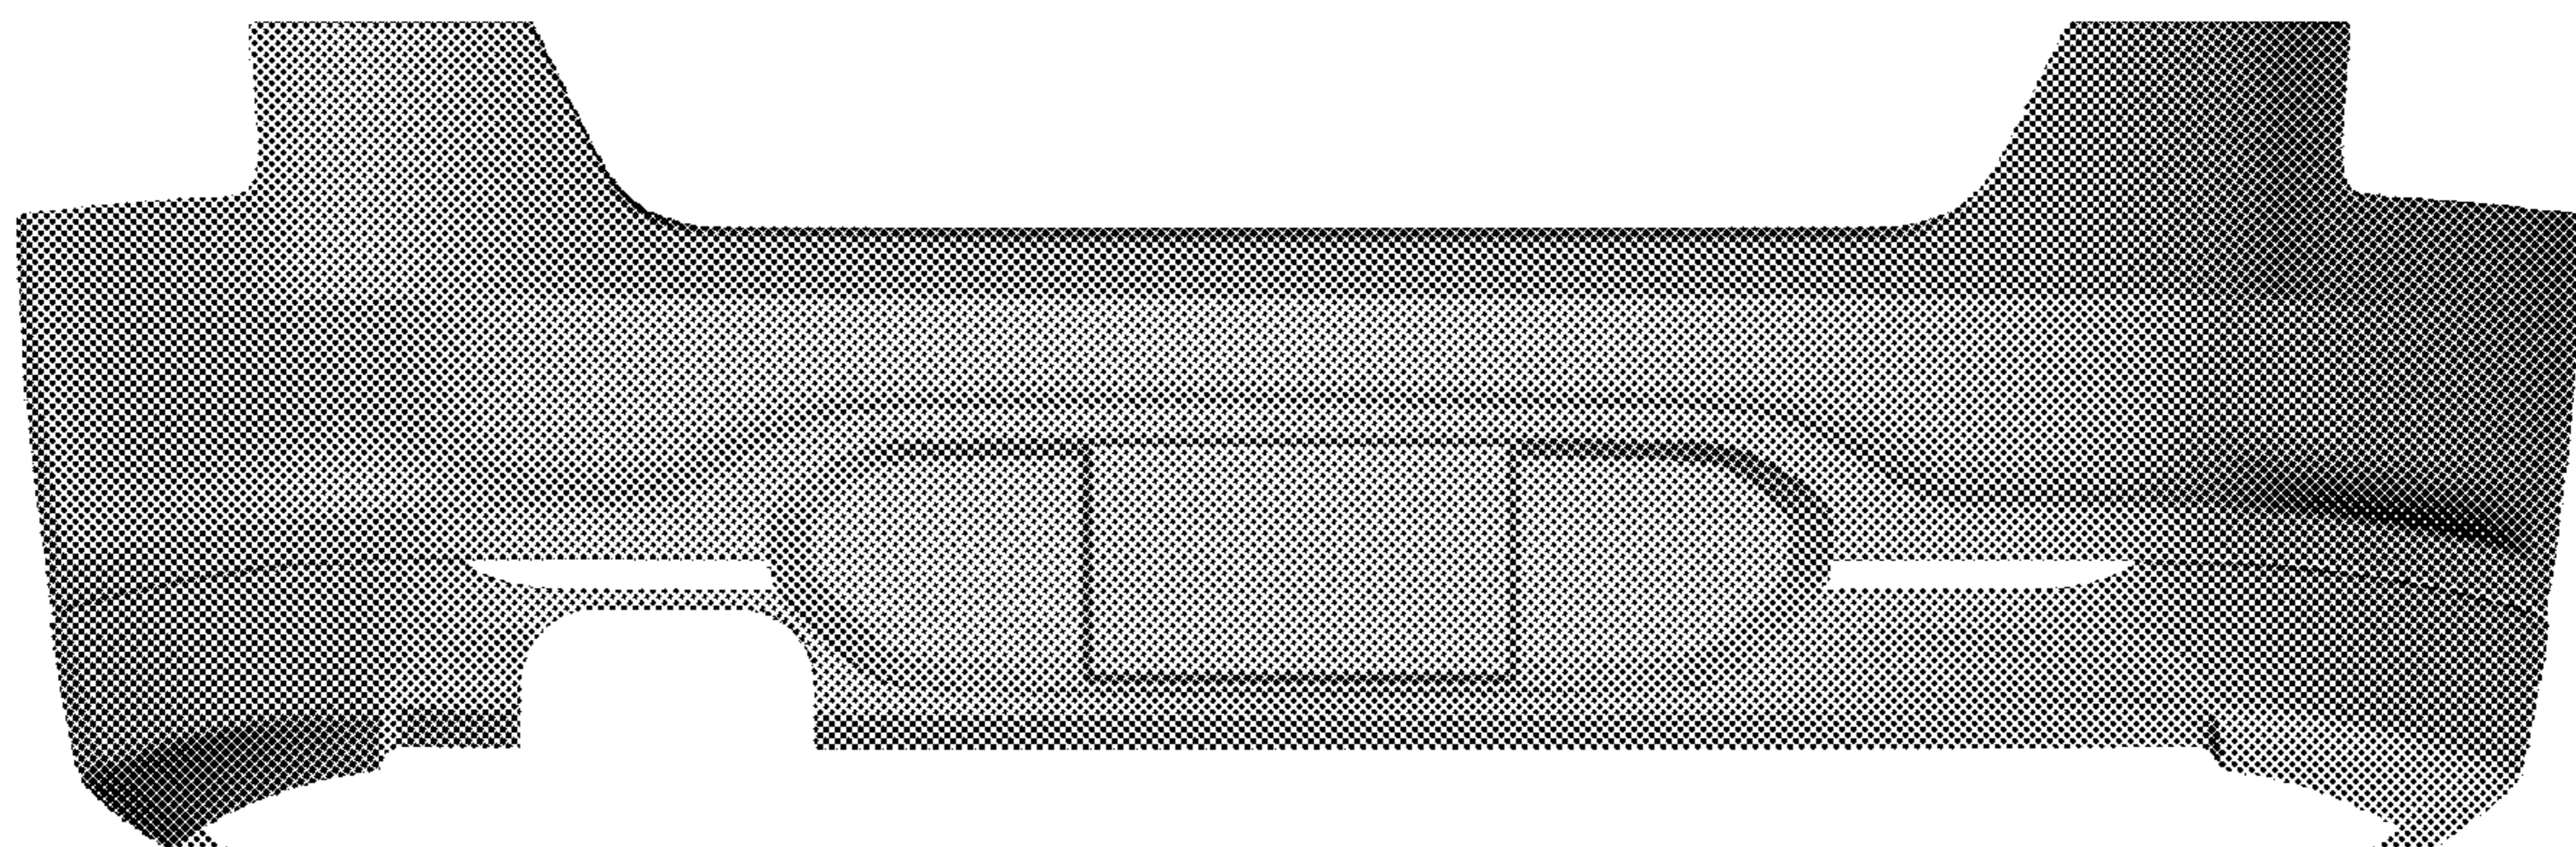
is a top plan view of the vehicle rear bumper cover;
